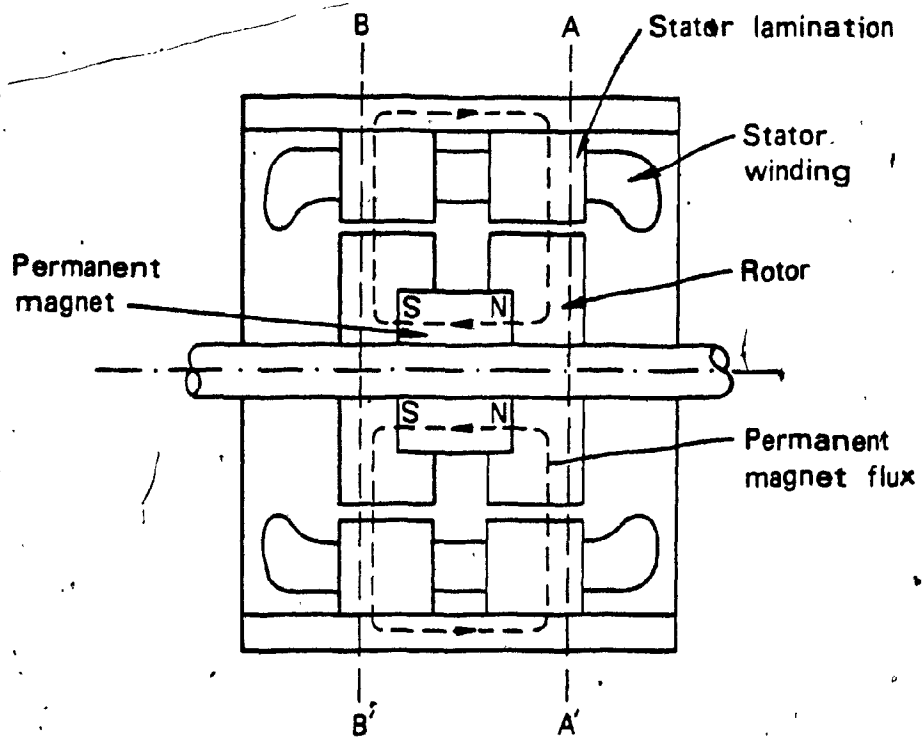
Axial View of a D-C P-M Stepping Motor.
